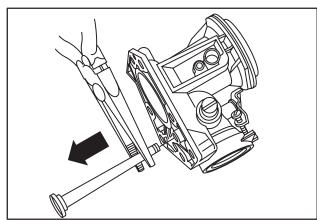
REMOVING PICK-UP TUBE VACU-JET CARBURETOR
